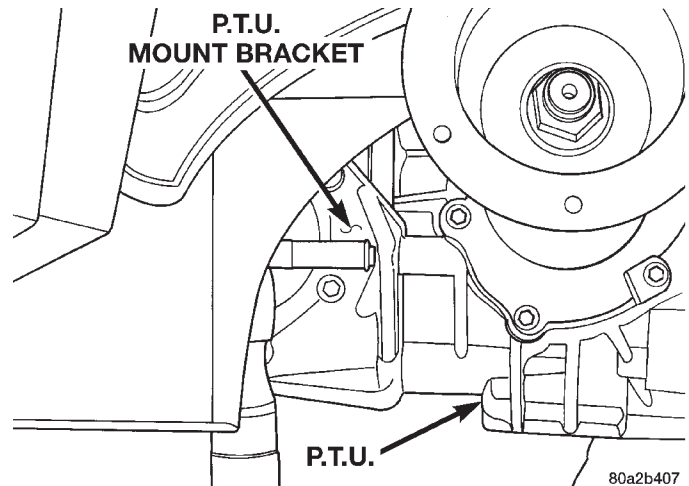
Remove Rear P.T.U. Bracket Bolts
